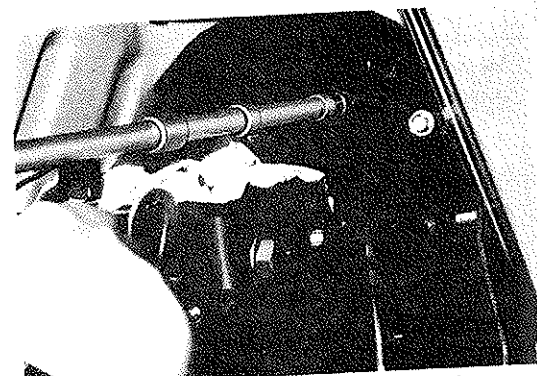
Fastening the connecting bolts between engine and transmission
